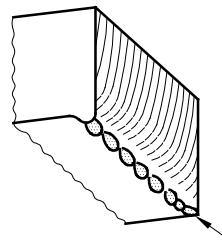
String of solidified droplets adhering to the bottom cut edge
